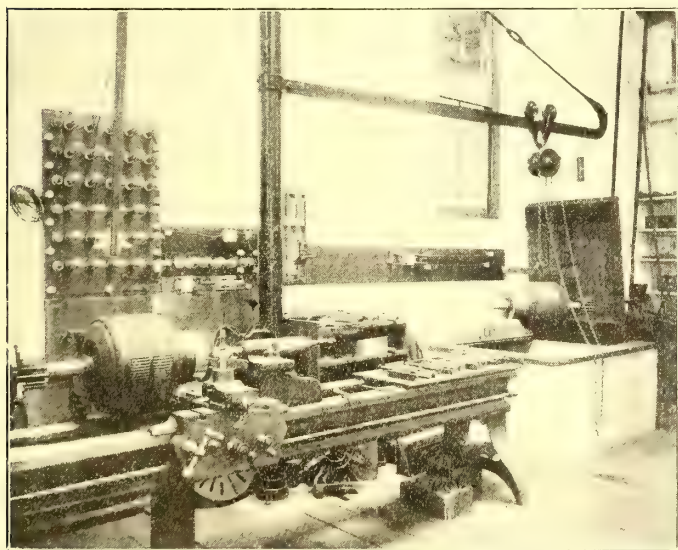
SCENE IN SHOPS, SHOWING LATHE, TESTING RACK, ARMATURE OVEN AND SWINGING CRANE
